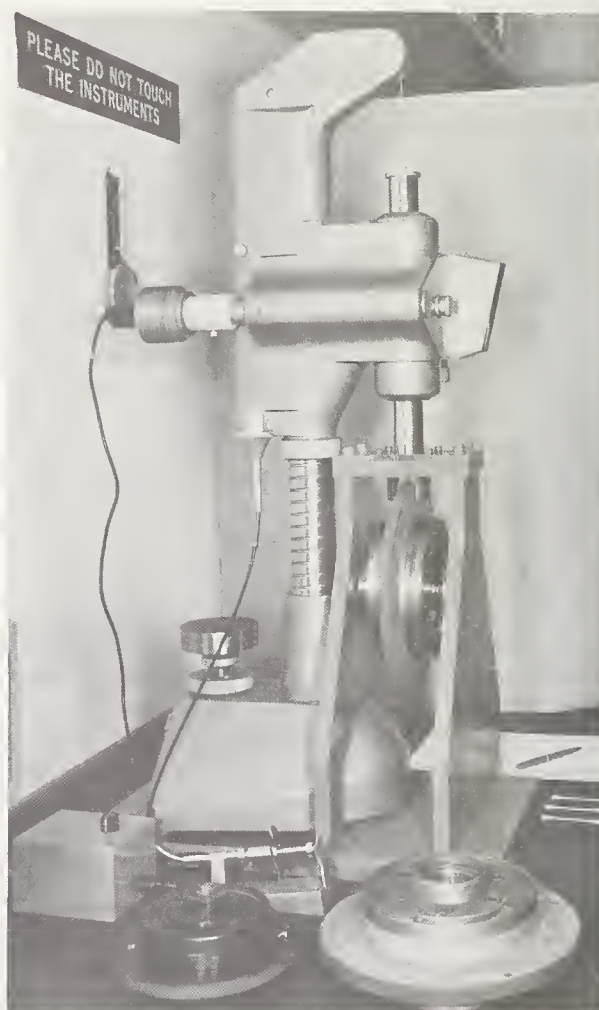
Special jig for measuring wear of wheels for cylindrical grinding tests.
